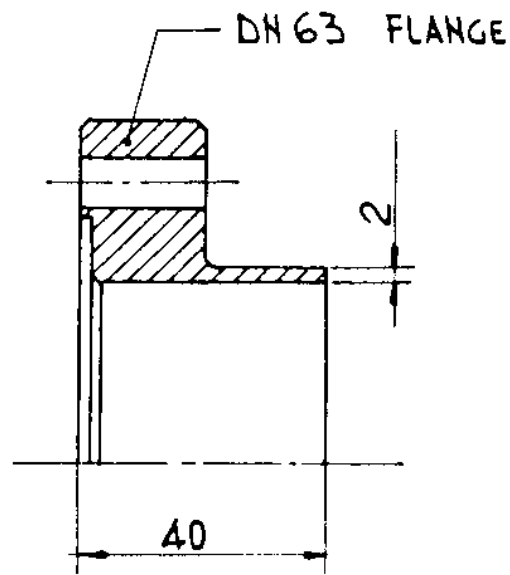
AN ALLUMINUM PROPER WELDING BETWEEN A TUBE AND A FLANGE.
